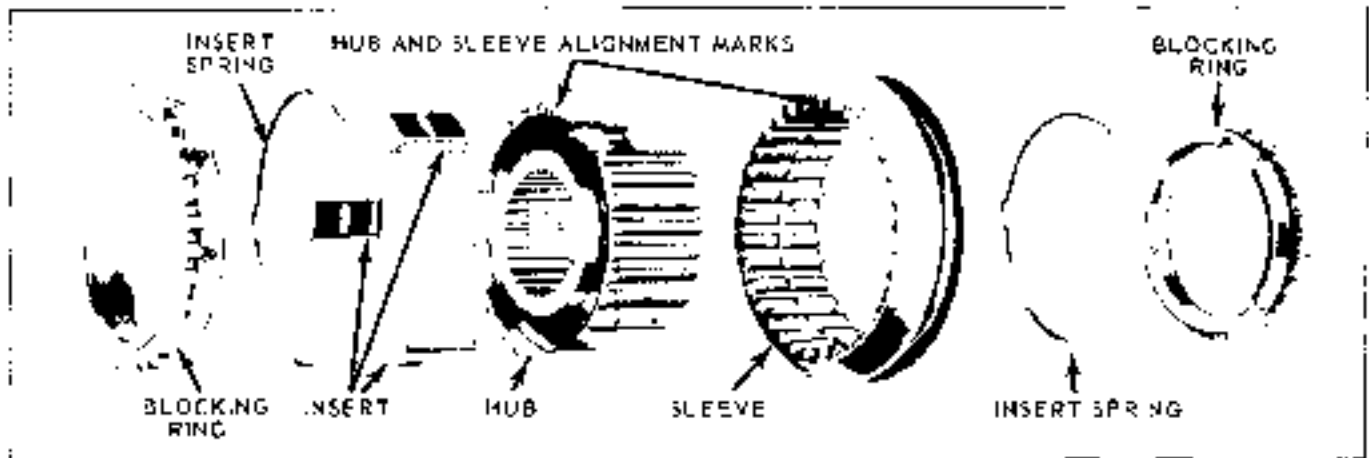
A-14 Exploded View of Second and Third Synchronizer
